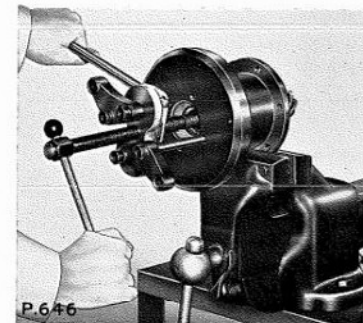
Withdrawing the driver coupling, using the Churchill Main Tool 55 in conjunction with the legs R.G.55-8 and the adaptor set R.G.55-10
